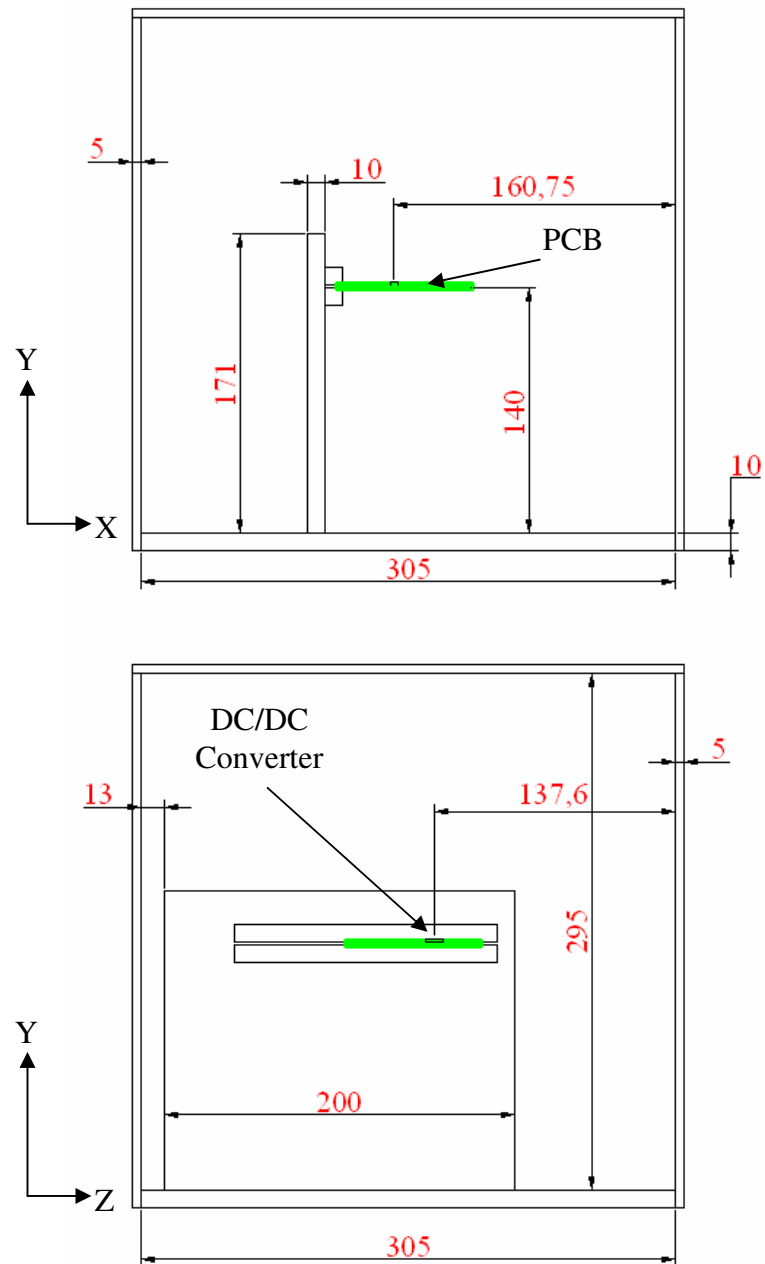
Dimensions (in mm) of the Test Enclosure Assembly
